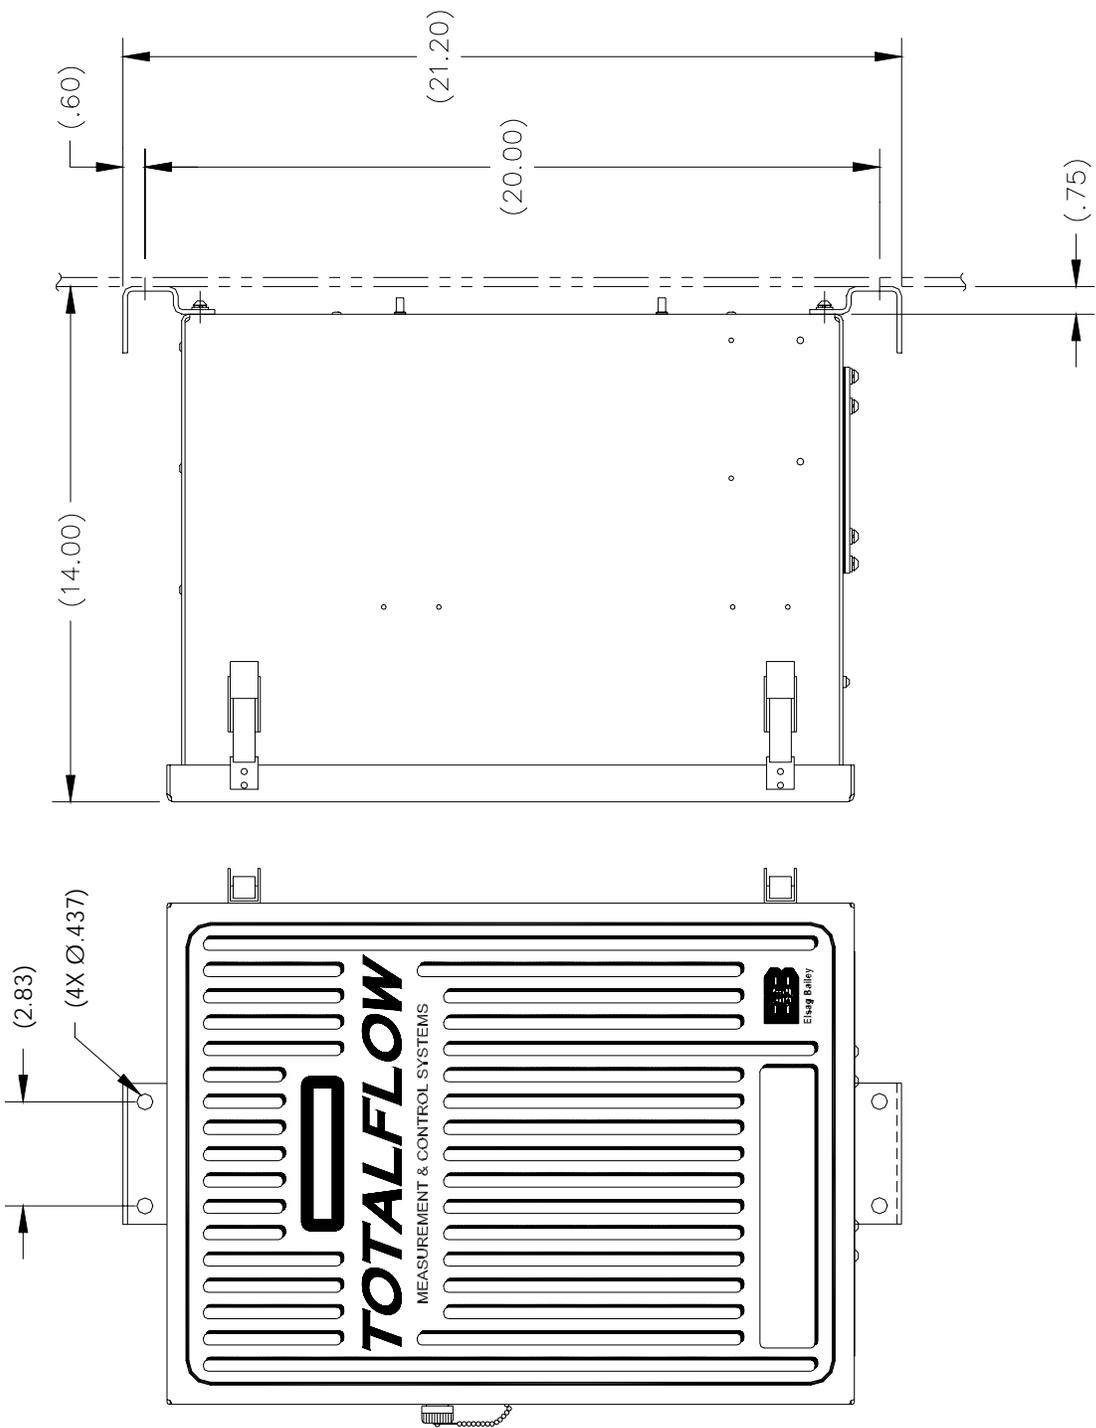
4 Wall-mount Dimension Drawing, Model 6790 RTU
